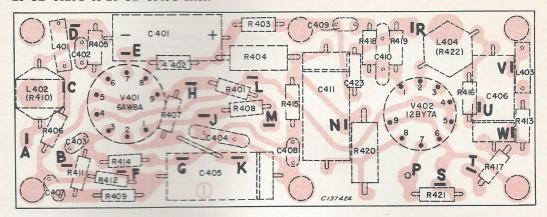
PW400 Printed Wiring Video & AGC Assembly
